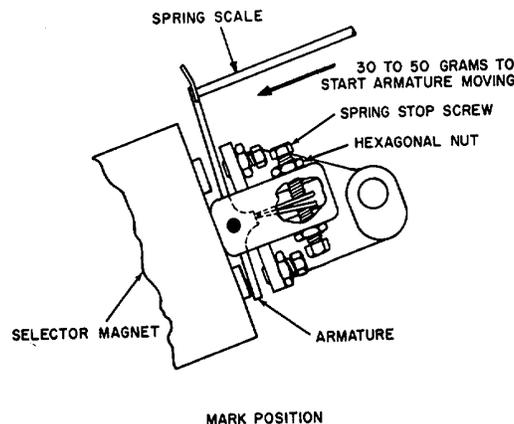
Armature leaf-spring adjustment (TT-76/GGC).
